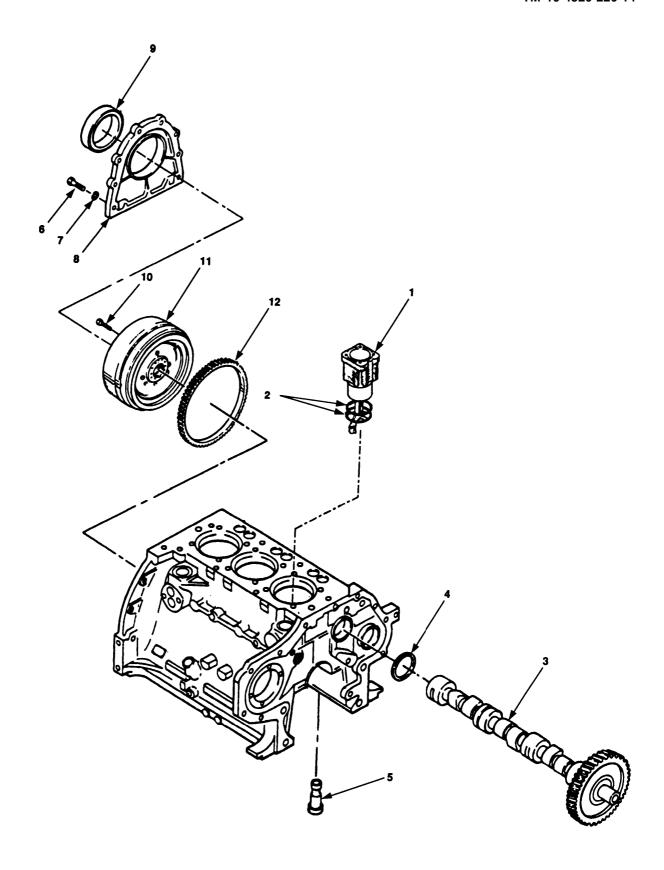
Cylinders Camshaft and Flywheel Removal.
